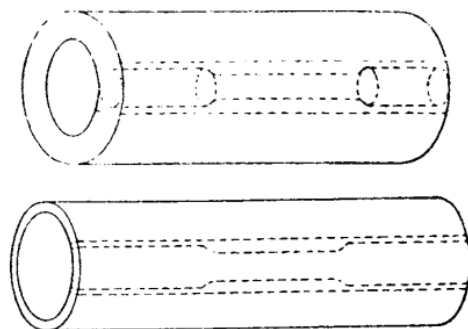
Squeezing Jig for Flattening Ends of Full-Size Tension Test Specimens
